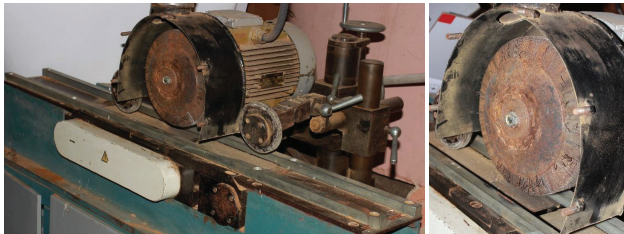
Experimental installation for surface cleaning using a needle milling tool
